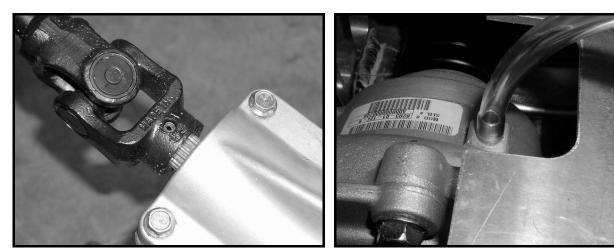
Roll Pin in Driveshaft and Pinion Shaft
